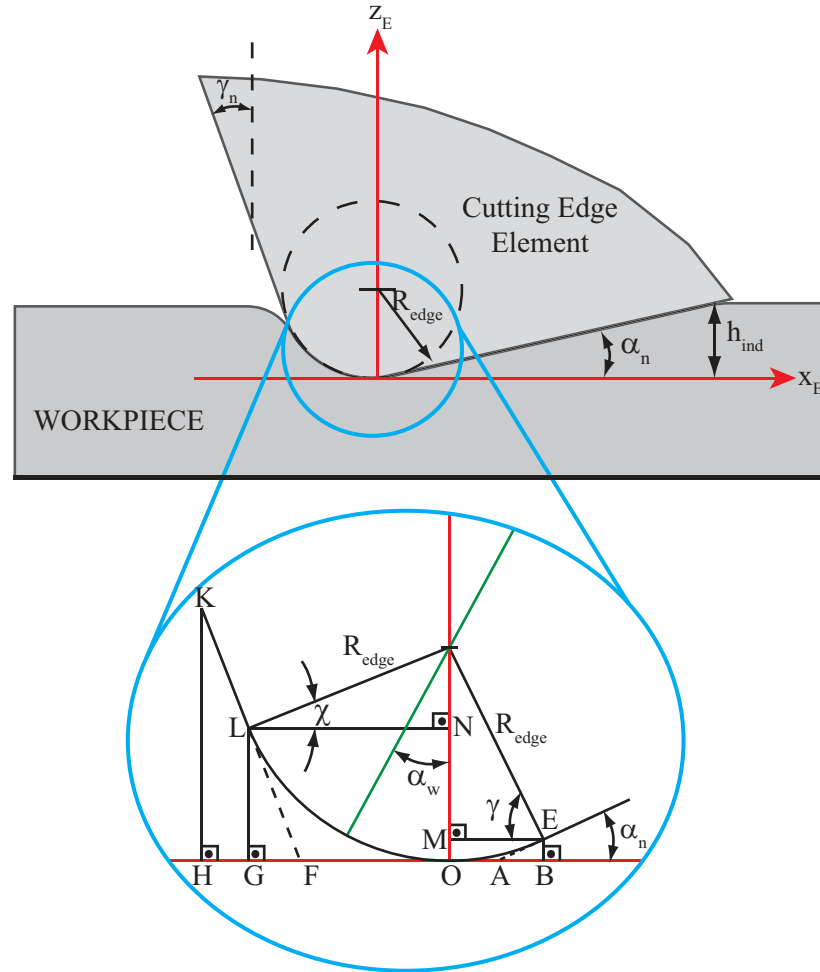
Geometrical similarity between a wedge with rounded tip and cutting edge element
